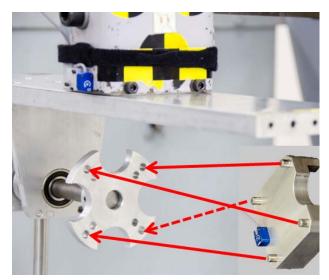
Alignment of neck mounting adapter locator pins with neck attachment plate locator holes
